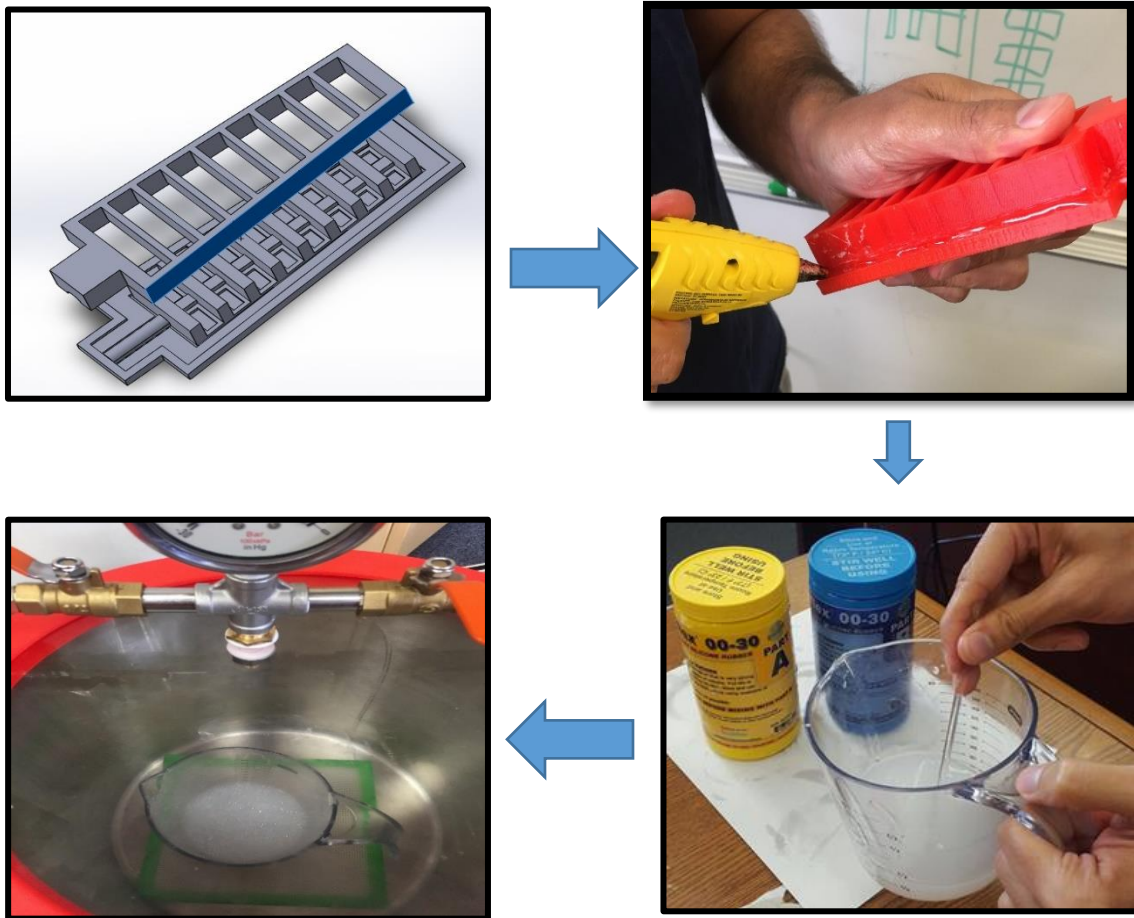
Fabrication steps for molding the PneuNet soft actuator.
